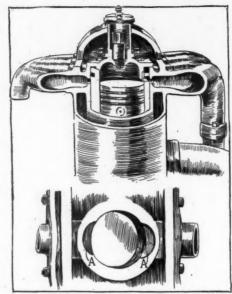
SECTIONAL ELEVATION AND PLAN THROUGH HEAD OF FISCHER ENGINE
